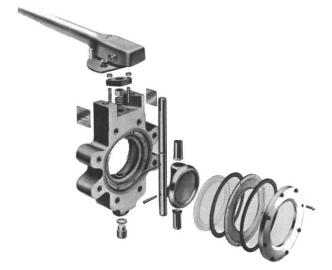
Butterfly valve with internal bolted retaining flange *Courtesy of Tyco Flow Control
